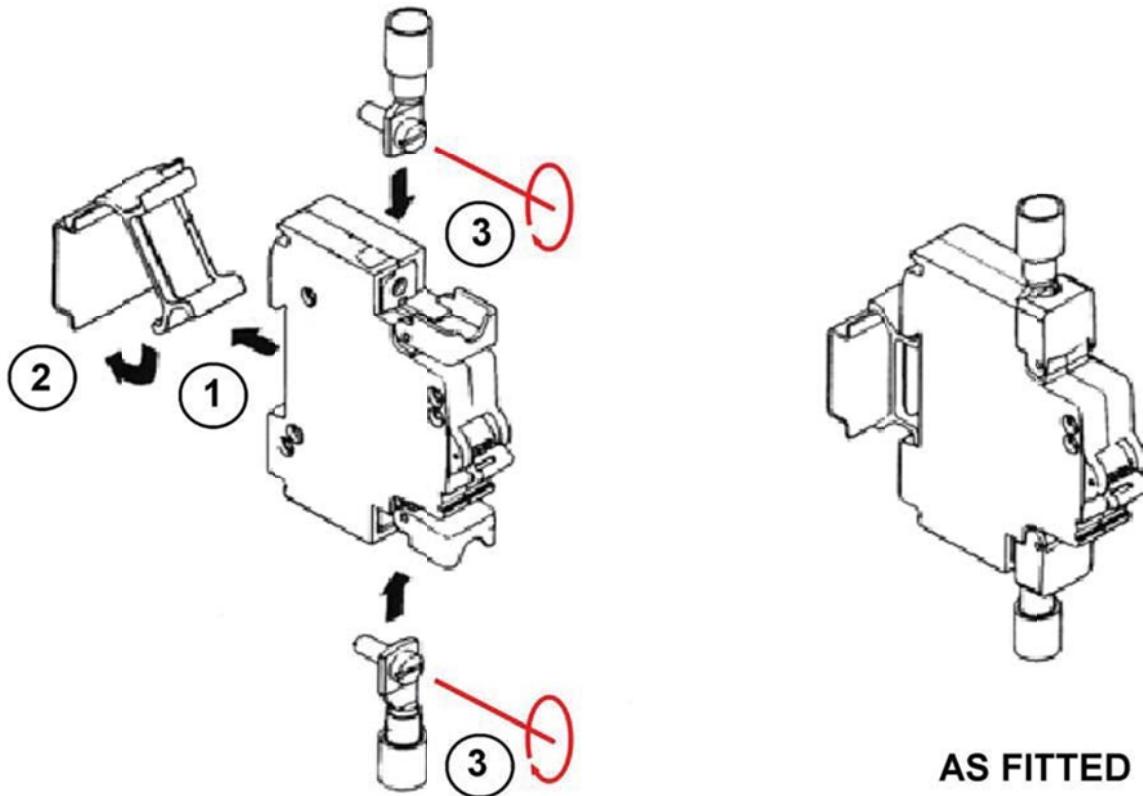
LV LOCKER –MIRROR ADJUSTER 10F03 CIRCUIT BREAKER INSTALLATION
